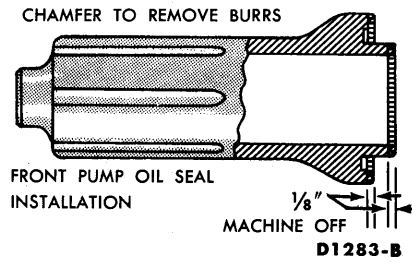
Dimensions for Reworking Front Pump Seal Installing Tool
